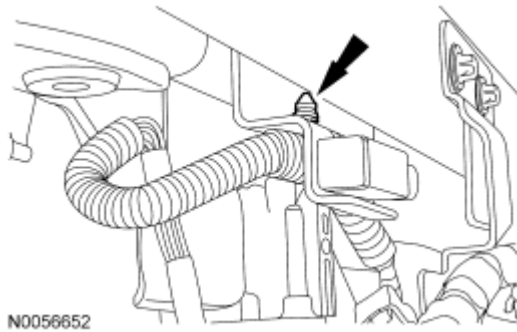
Locating Wire Harness Routing Pin-Type Retainer From Seat Position Sensor Bracket
